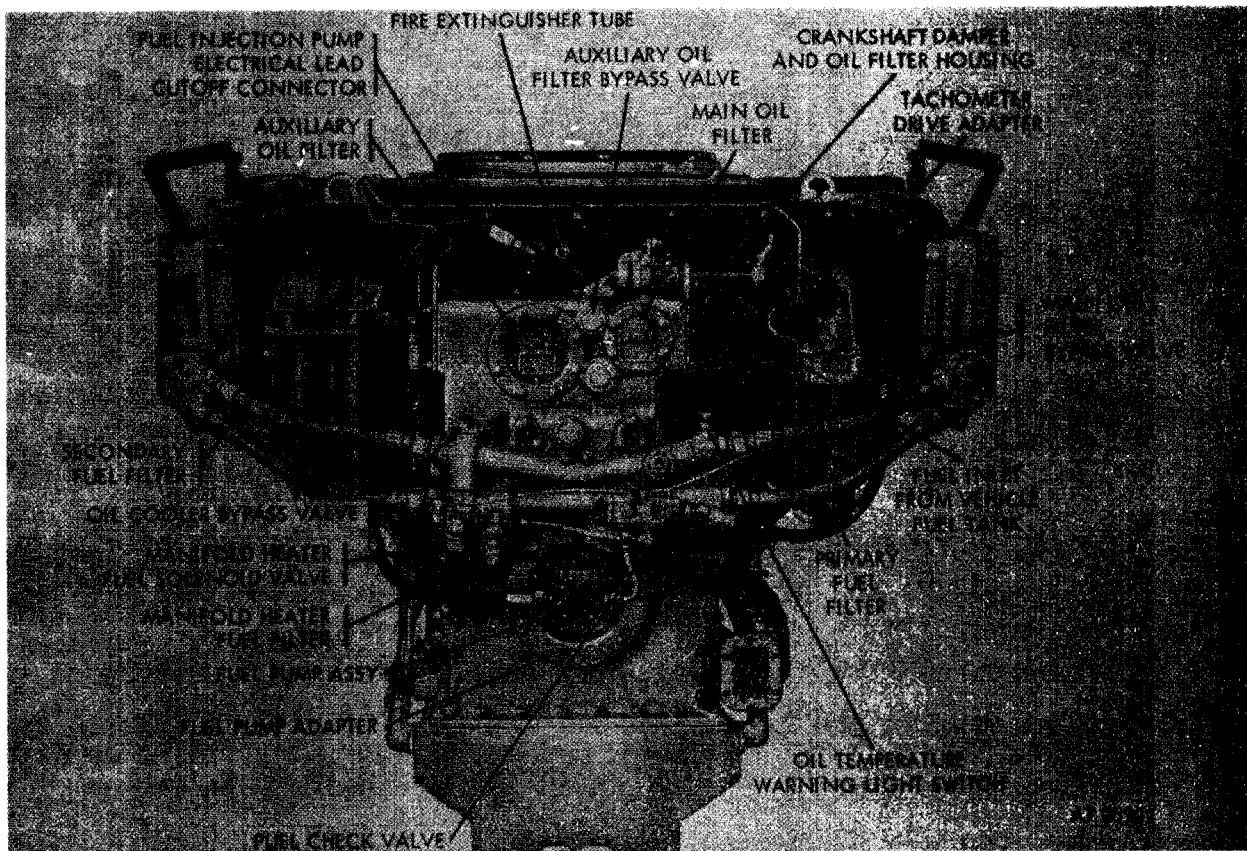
AVDS-1790-2-M, AVDS-1790-2-AM, and AVDS-1790-2A engine assembly with secondary fuel filter-front view.
